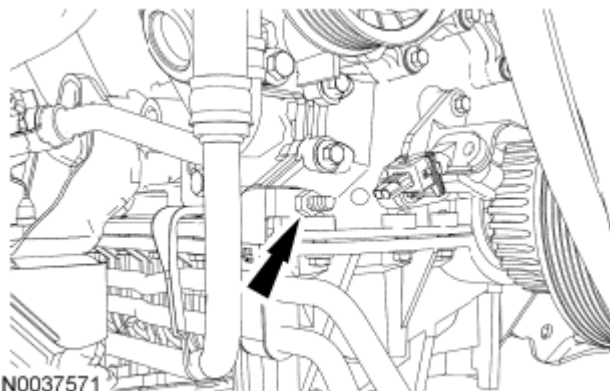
Locating Transmission Cooler Tube Bracket And Nut
